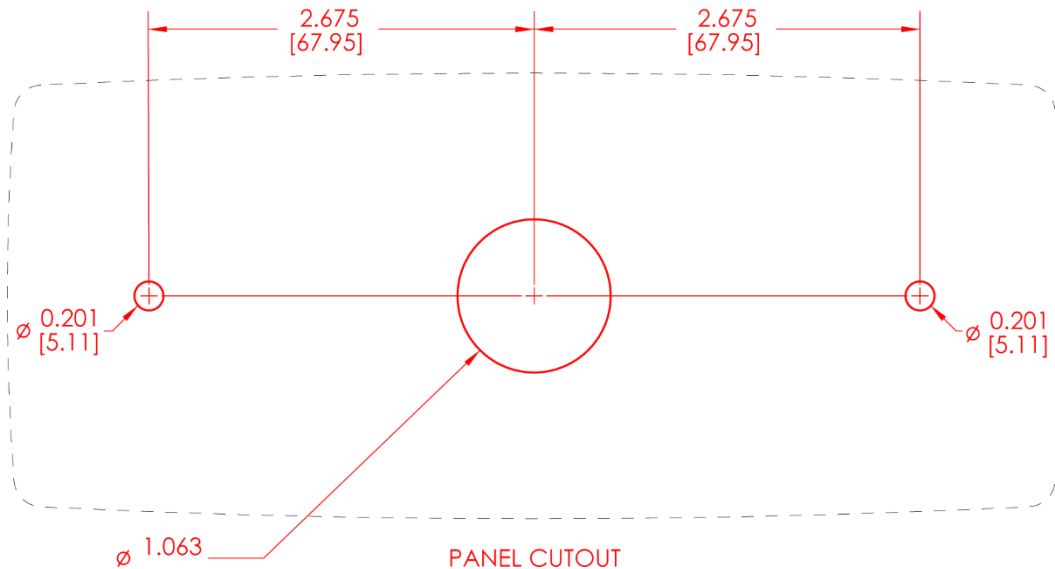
SmartTOUCH, 12 position installation dimensions in inches [millimeters].
